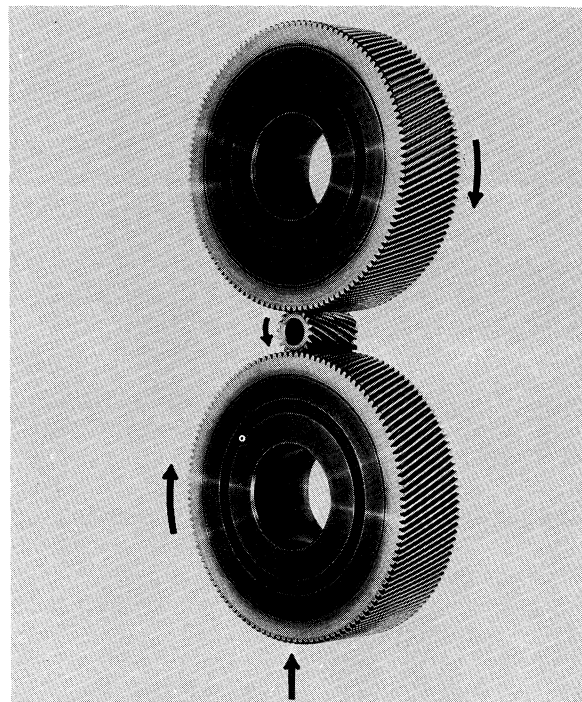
Operating principle of double-die gear roll-finishing.
